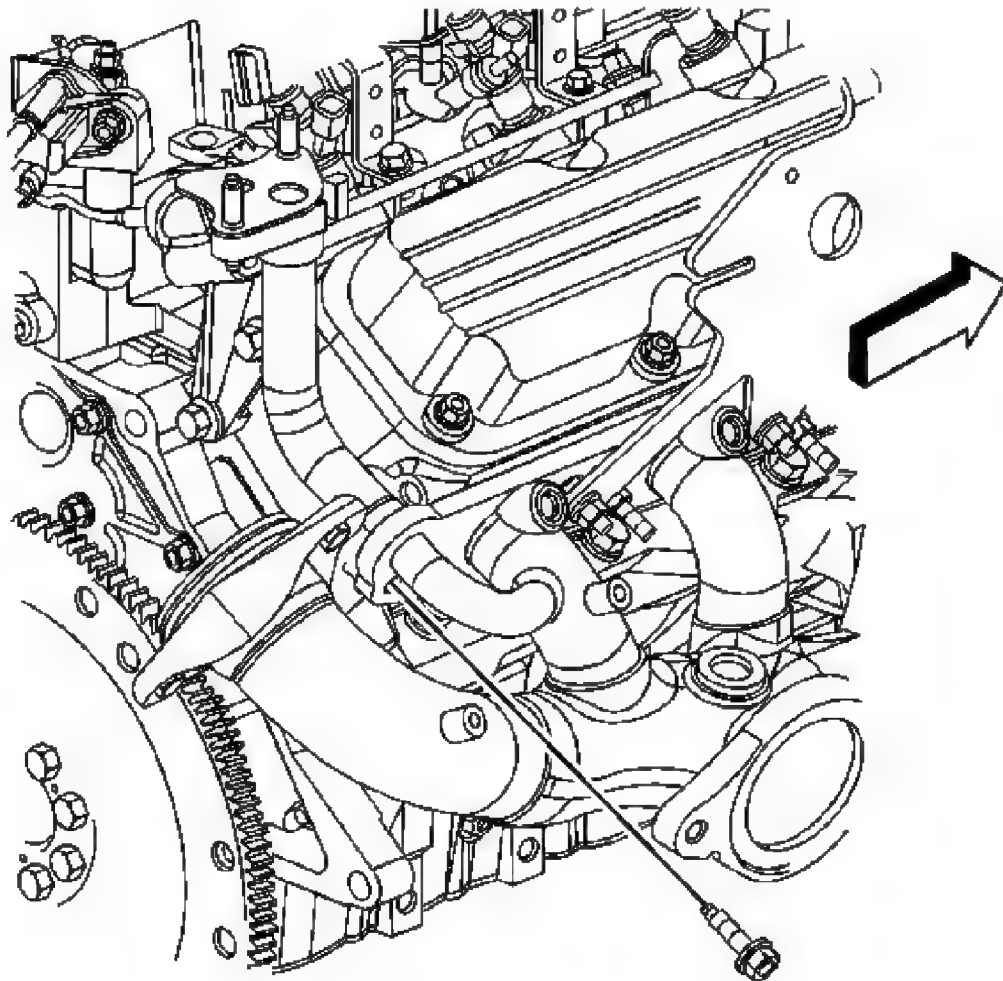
View Of Exhaust Gas Recirculation (EGR) Valve Adapter Pipe Bolt
